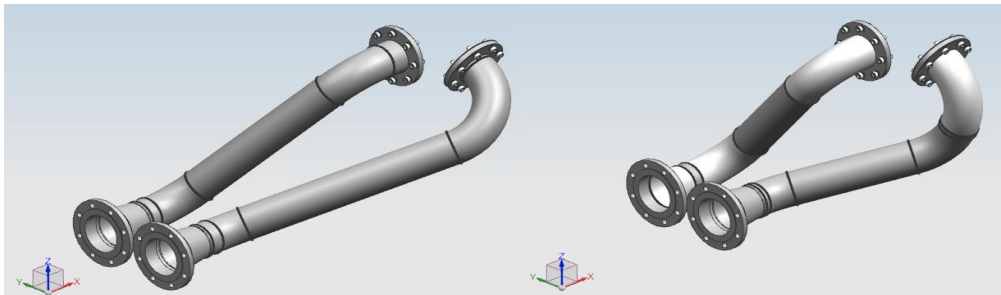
Lubricating Oil Pipes. (LO Inlet & LO Outlet, old & new, welding bends and new reducer highlighted.)
